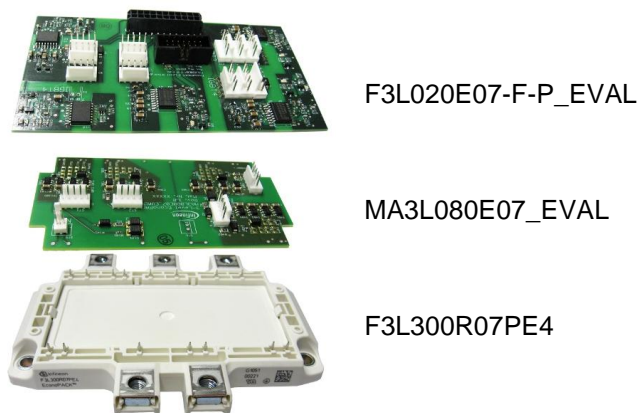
Driver board, adapter board and IGBT module of the 3-level evaluation kit
